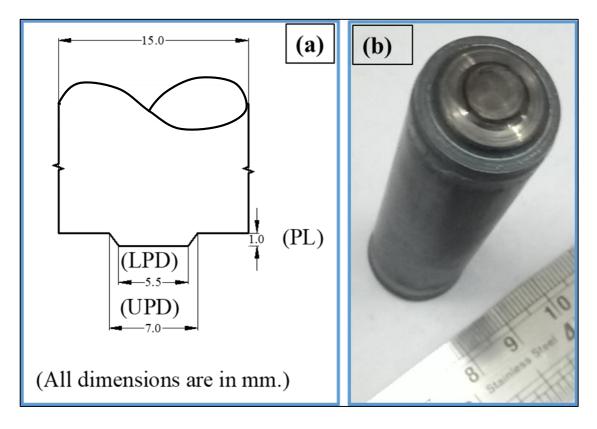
Profile of FSP tool: (a) schematic diagram of FSP tool, and (b) actual FSP tool.
